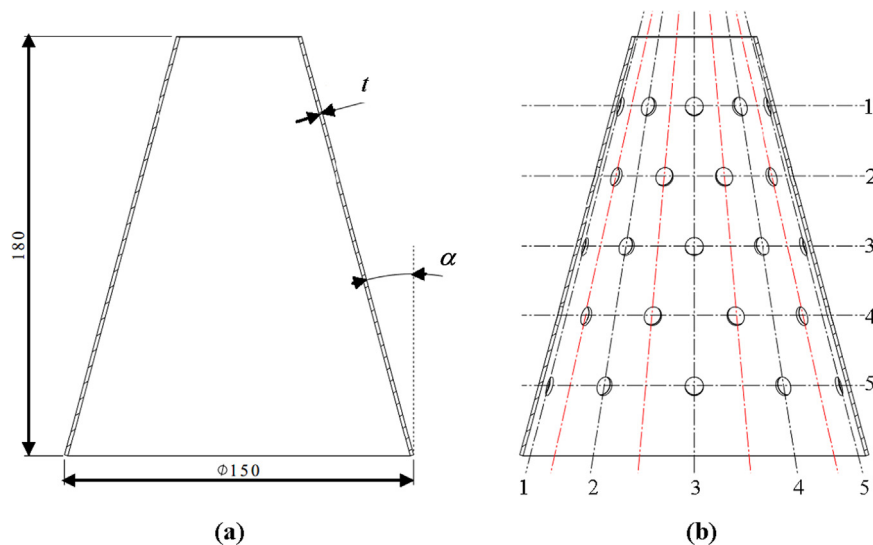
The geometry of the thin-walled tube (a) without, and (b) with circular cutouts. The dimensions are in millimeters.
